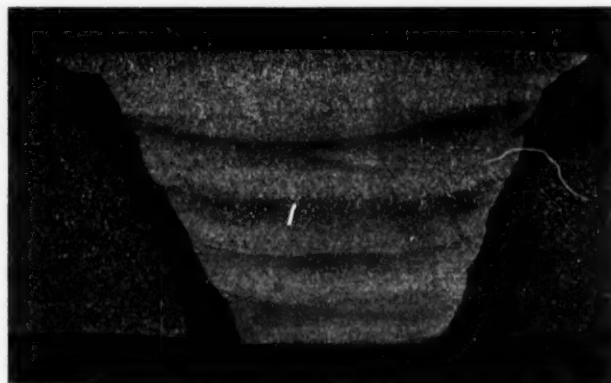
Macrograph section of present type of weld, top portion of horizontal qualification-test weld. Magnification $2\frac{1}{2}$ times
